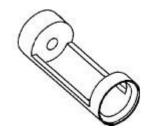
Valve Spring Adapter 6527 Courtesy of CHRYSLER LLC
